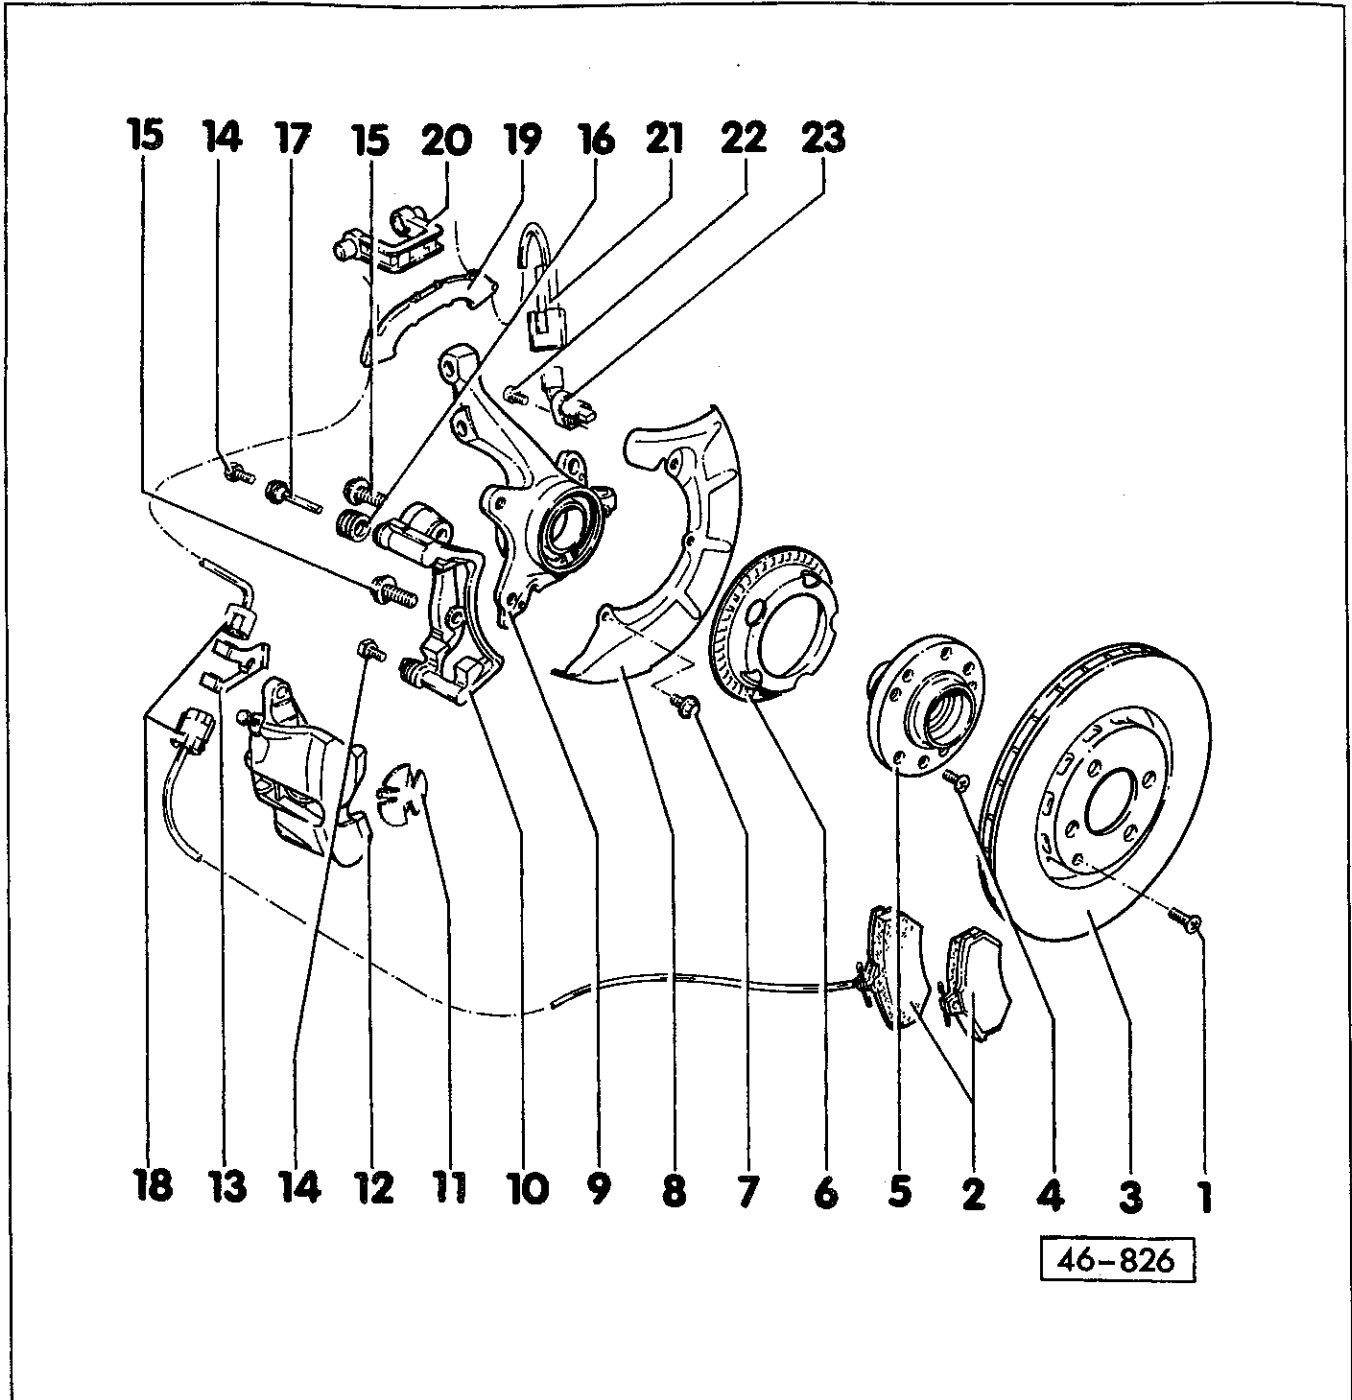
Exploded view of front brake with ventilated rotor and two-piece caliper.
